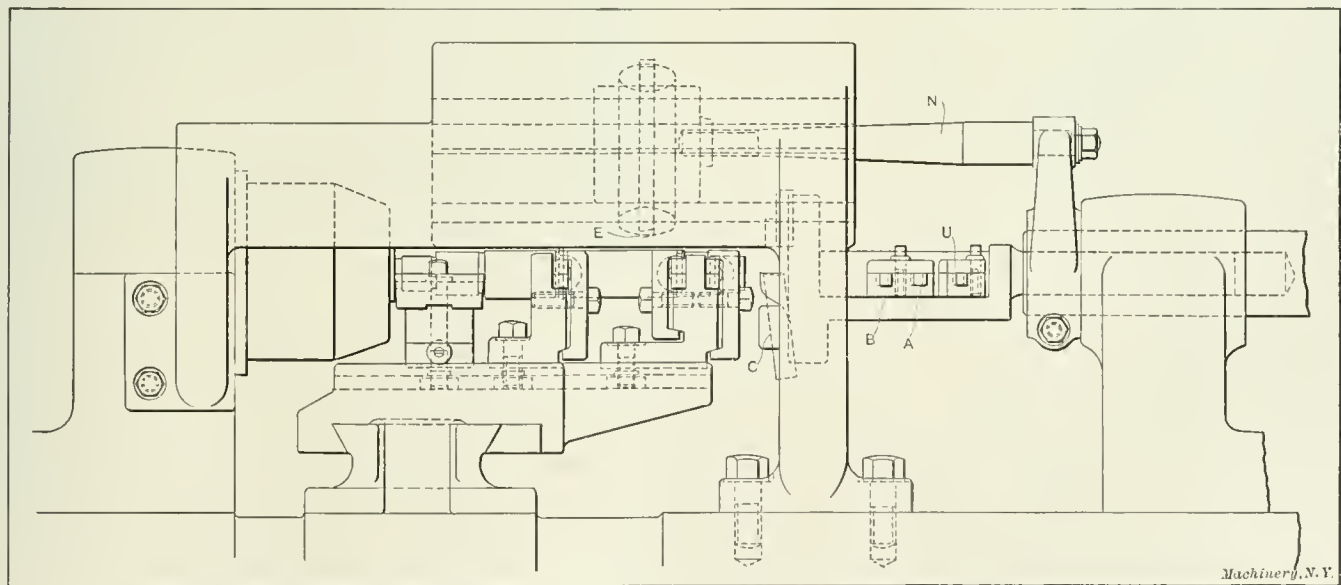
Front Elevation of Cleveland Machine arranged for Turning Shaft shown in Fig. 1
